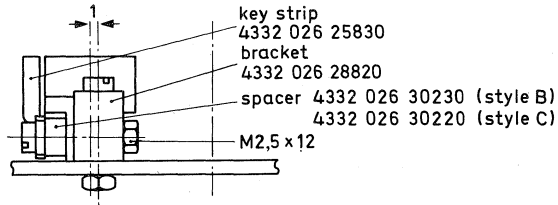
Key strip mounted to a male part with straight dip-solder pins.
